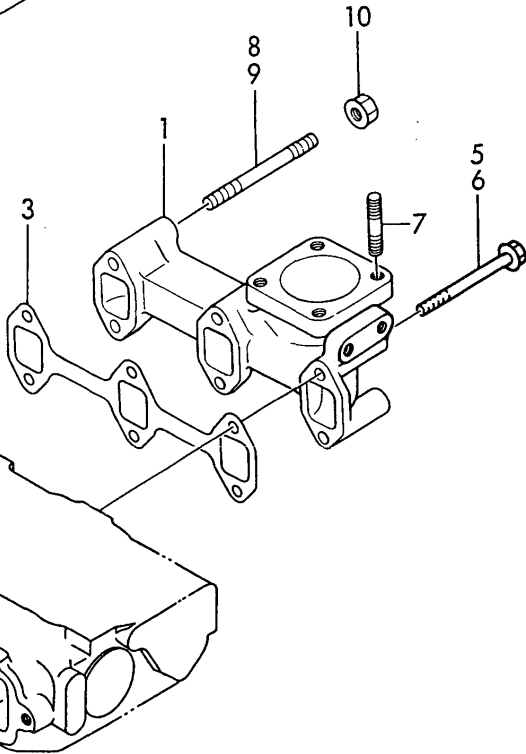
EXHAUST MANIFOLD (3TN75/82E)
